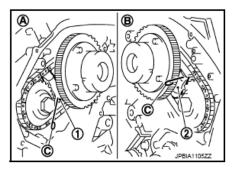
Identifying Stopper Pins (Bank 1 And 2) Courtesy of NISSAN MOTOR CO., U.S.A.
